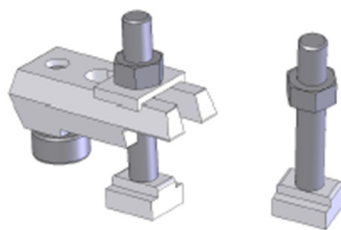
Clamping assembly on Injection Machine (DS, Standard Components, 2008)
